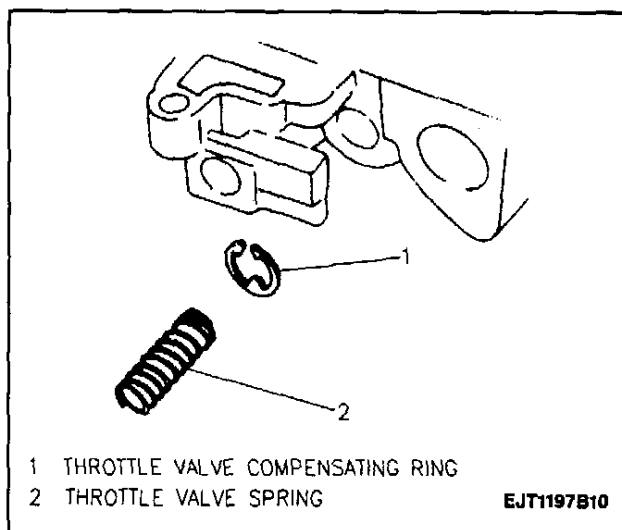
Removing Throttle Valve Spring and Compensating Ring(s) (03-72LE, 4-Speed)
